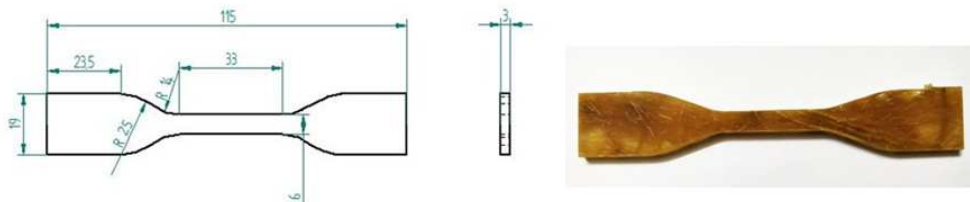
Test Specimen for Tension as per (ASTM D638-03)
